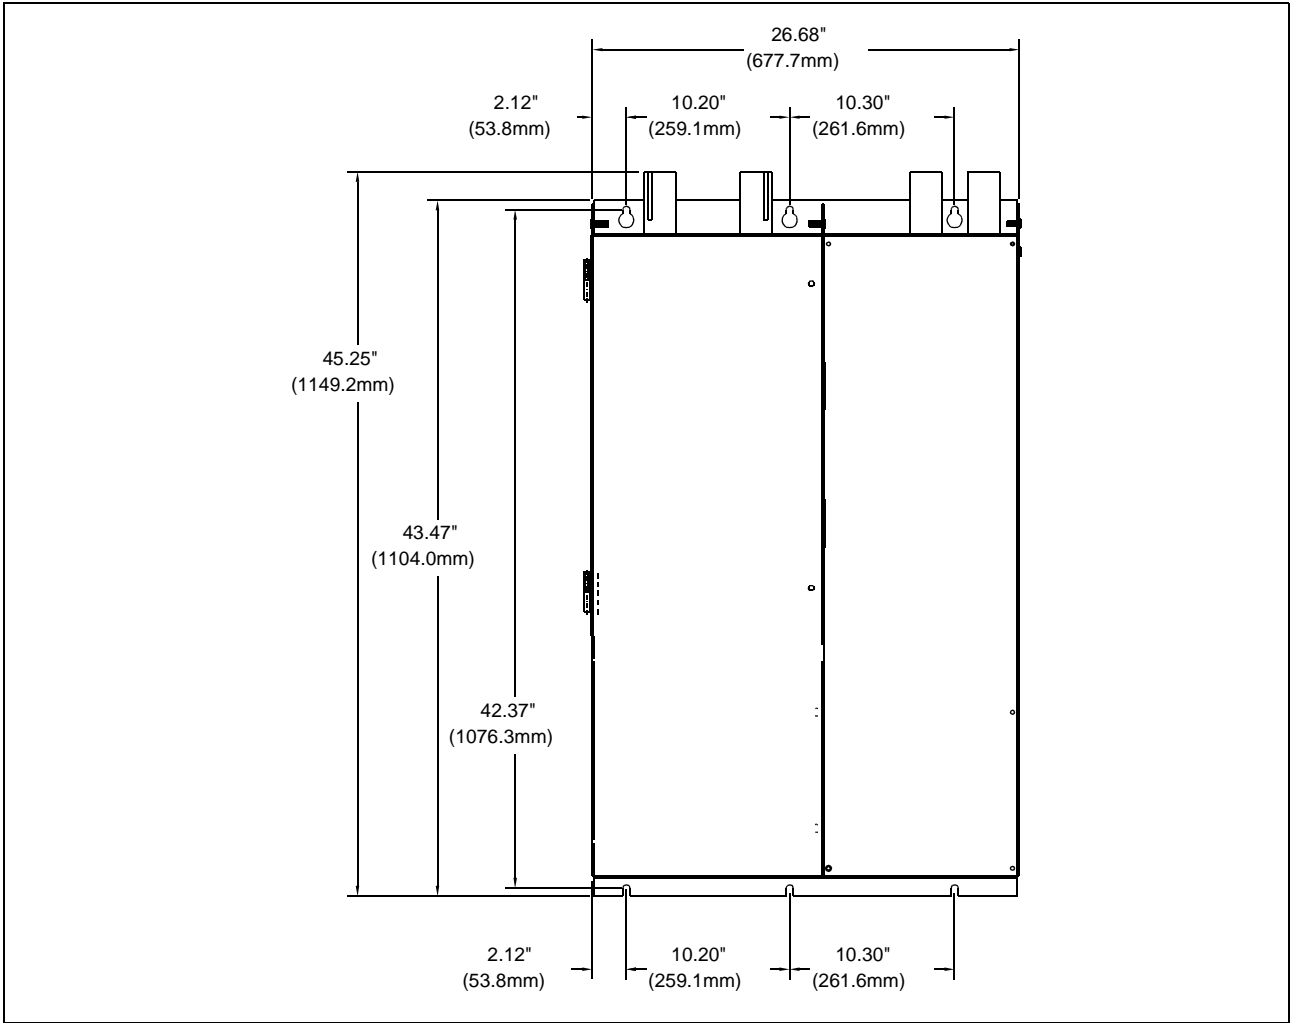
400 HP to 600 HP @ 460 VAC Drive Mounting Hole Pattern
